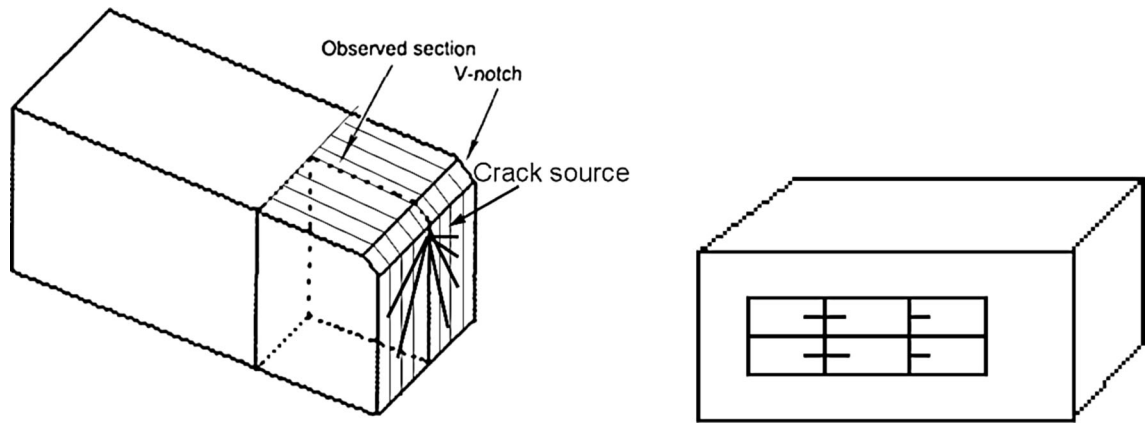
Cross section perpendicular to the fracture surface for revealing the retained cracks which identify the critical event of cleavage fracture.^[23]
